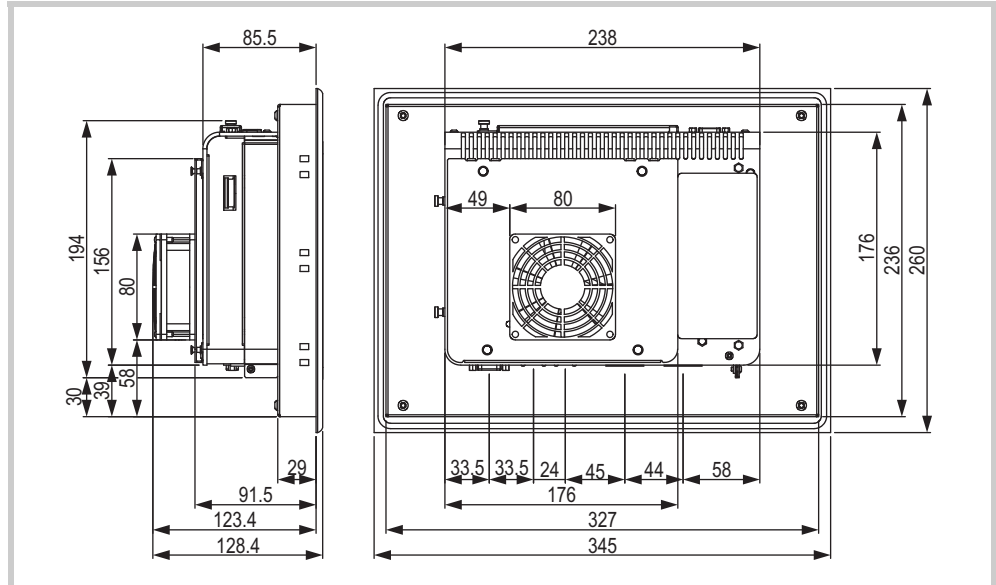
Mechanical dimensions of the 10.4" devices in mm
